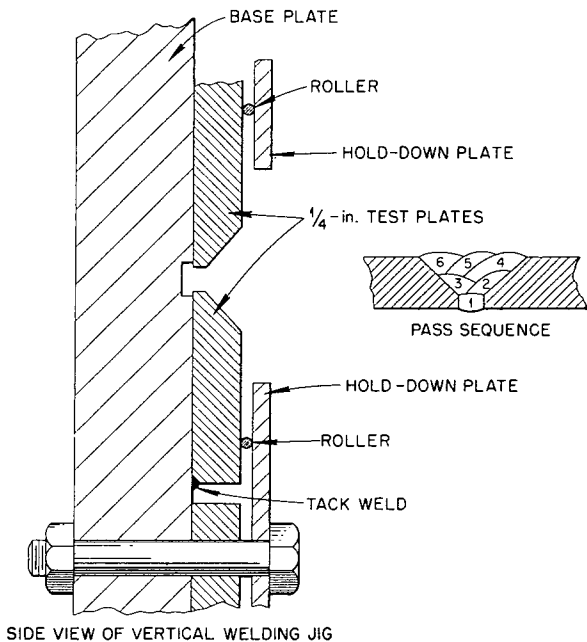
Assembly of Test Plates in Vertical Welding Jig.
